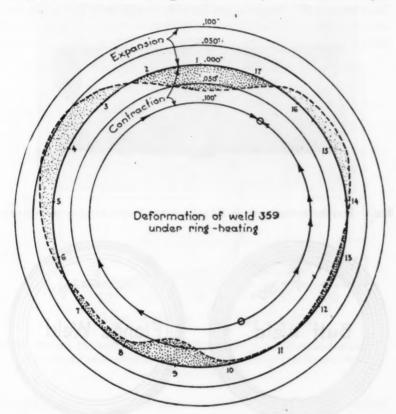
Relief of Residual Welding Stress Afforded by Simultaneous Heating of Whole Girth Weld
